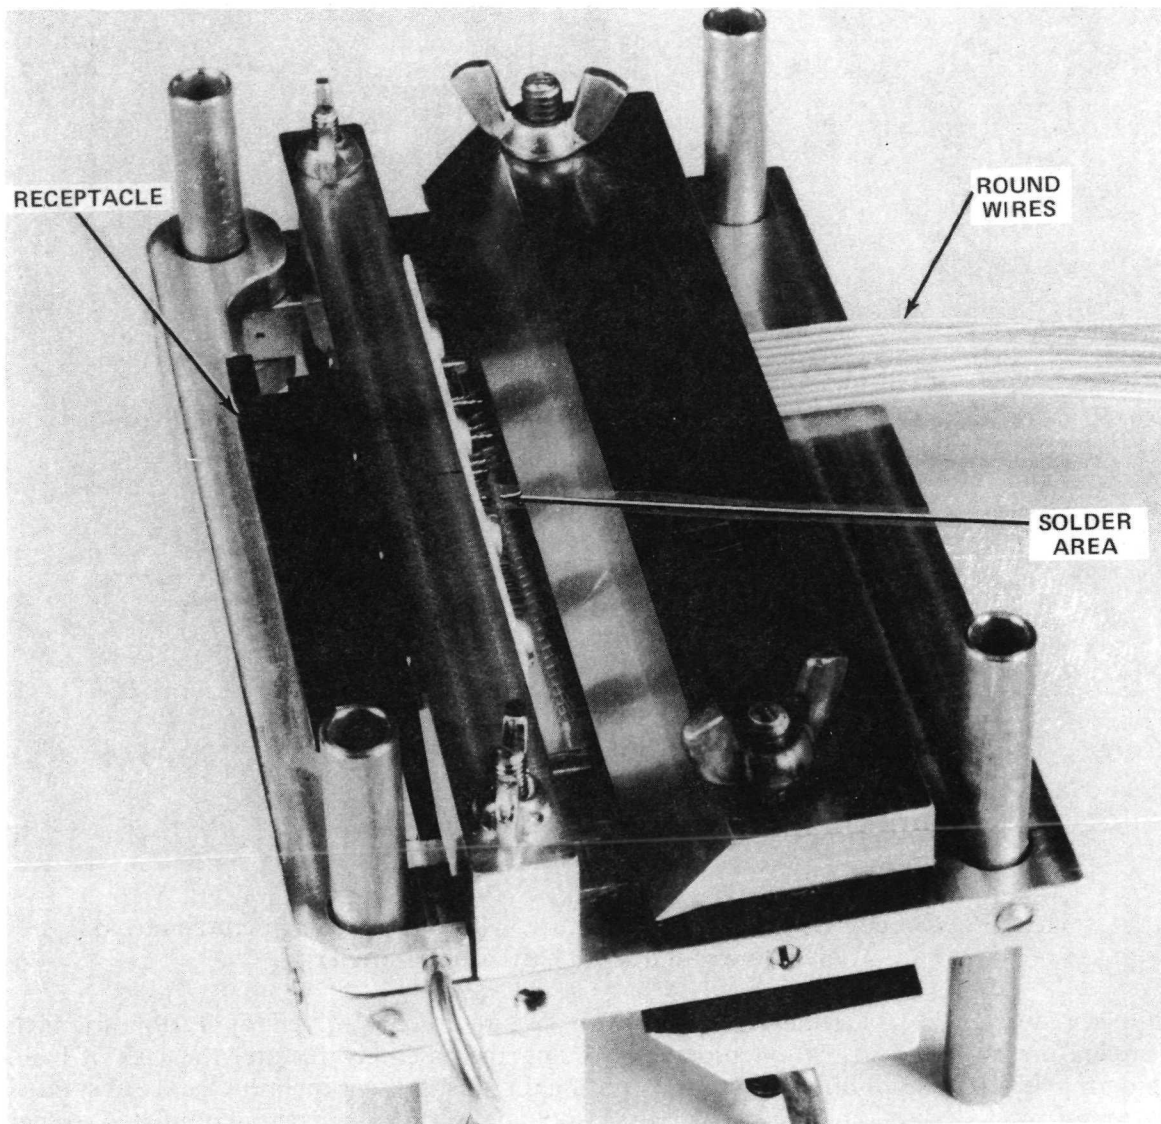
Fixture used in hand-soldering round wires to receptacle solder lugs (overall view).
